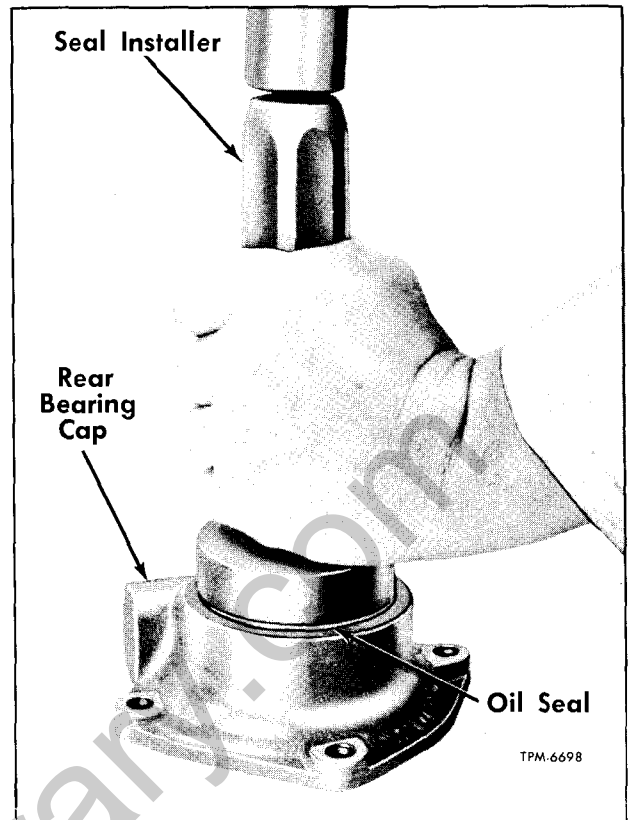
Installing Mainshaft Rear Bearing Cap Oil Seal
